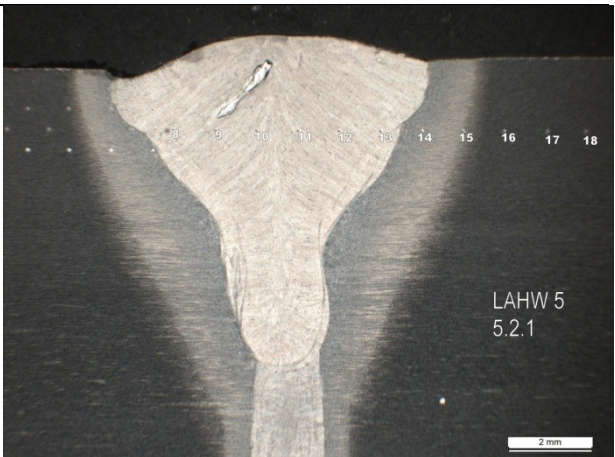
Measuring points of LAHW welded sample 5.
